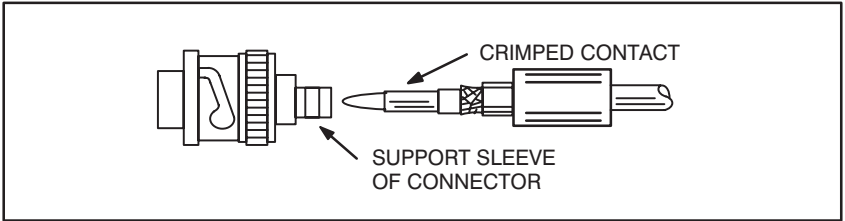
Connector Installation Step 6 for RG-59/U Cable
